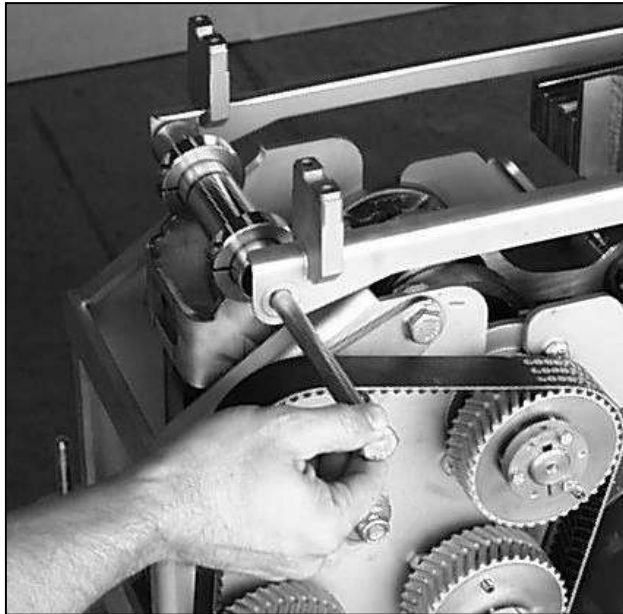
Loosening the Pan Attachment Arm Bolts
